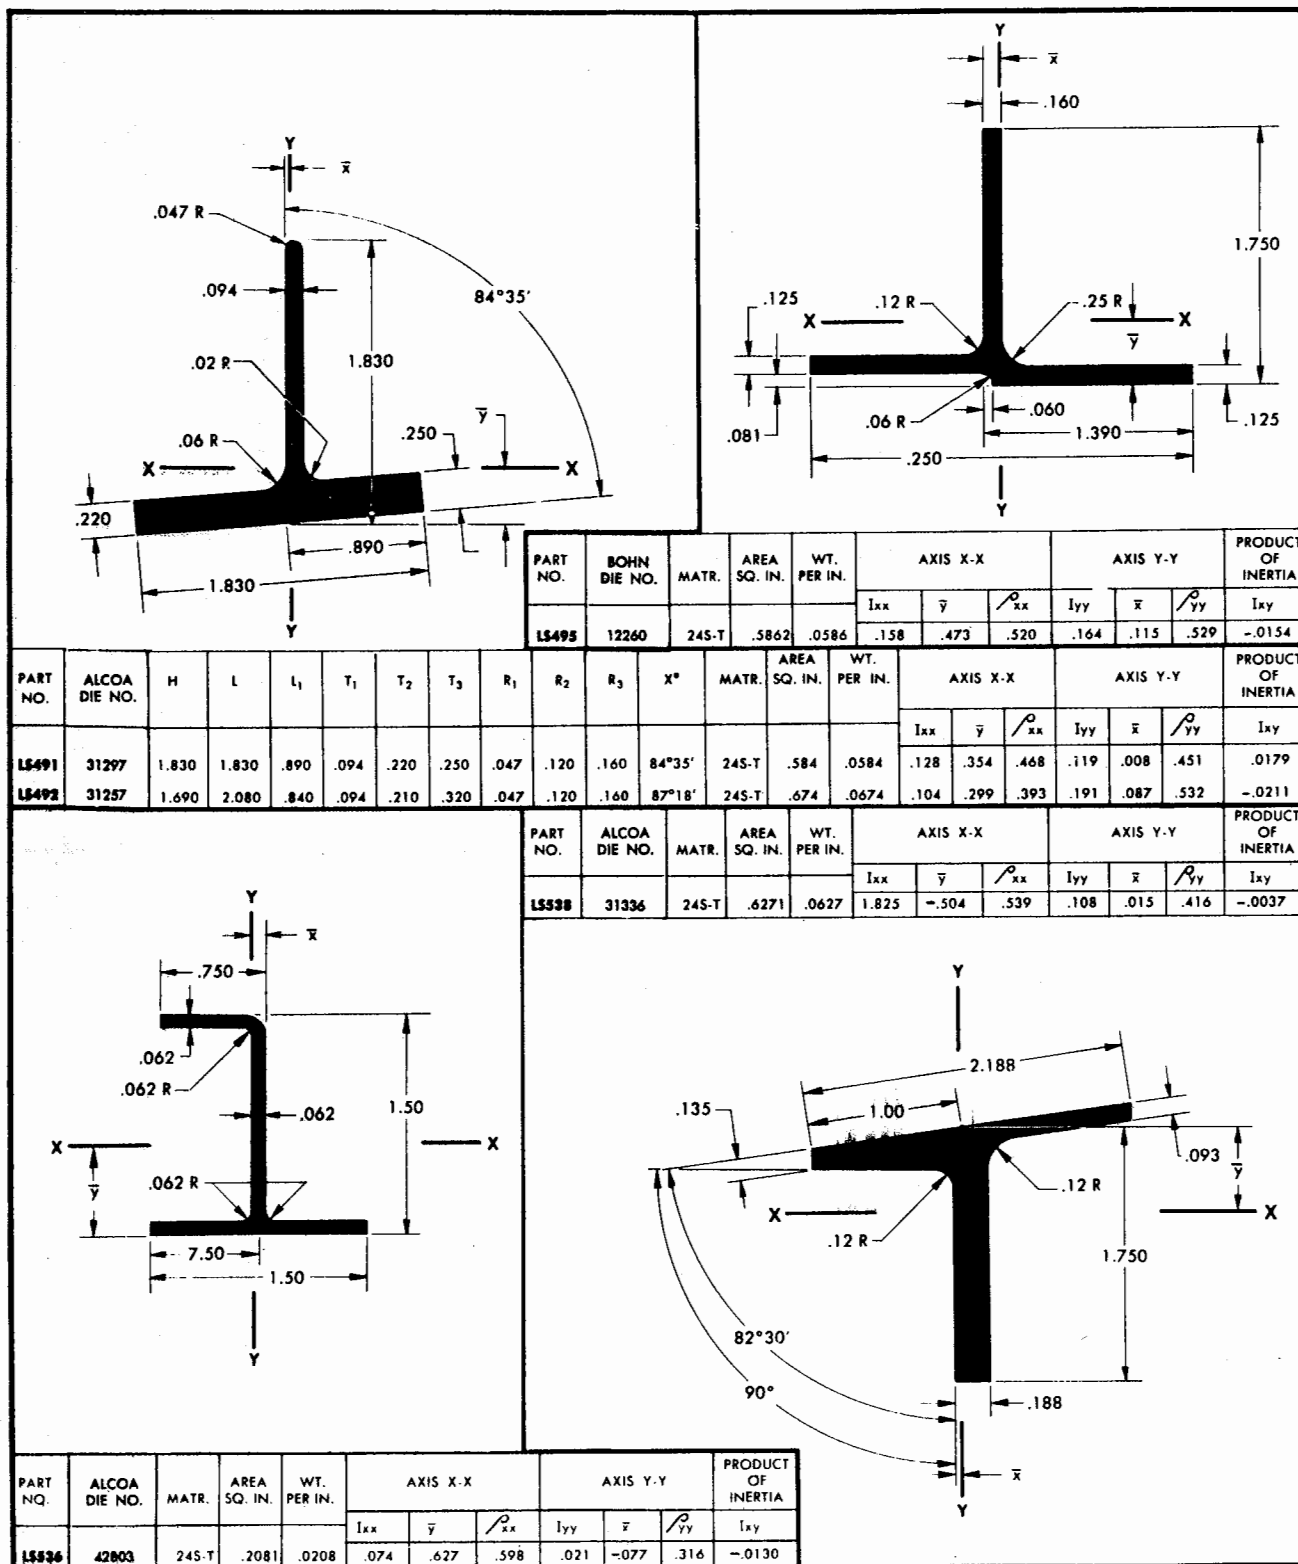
(Sheet 7 of 17 Sheets) — Extruded Standards
